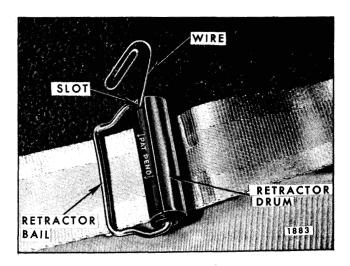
Locking Seat Belt Bail Type Retractor Drum
